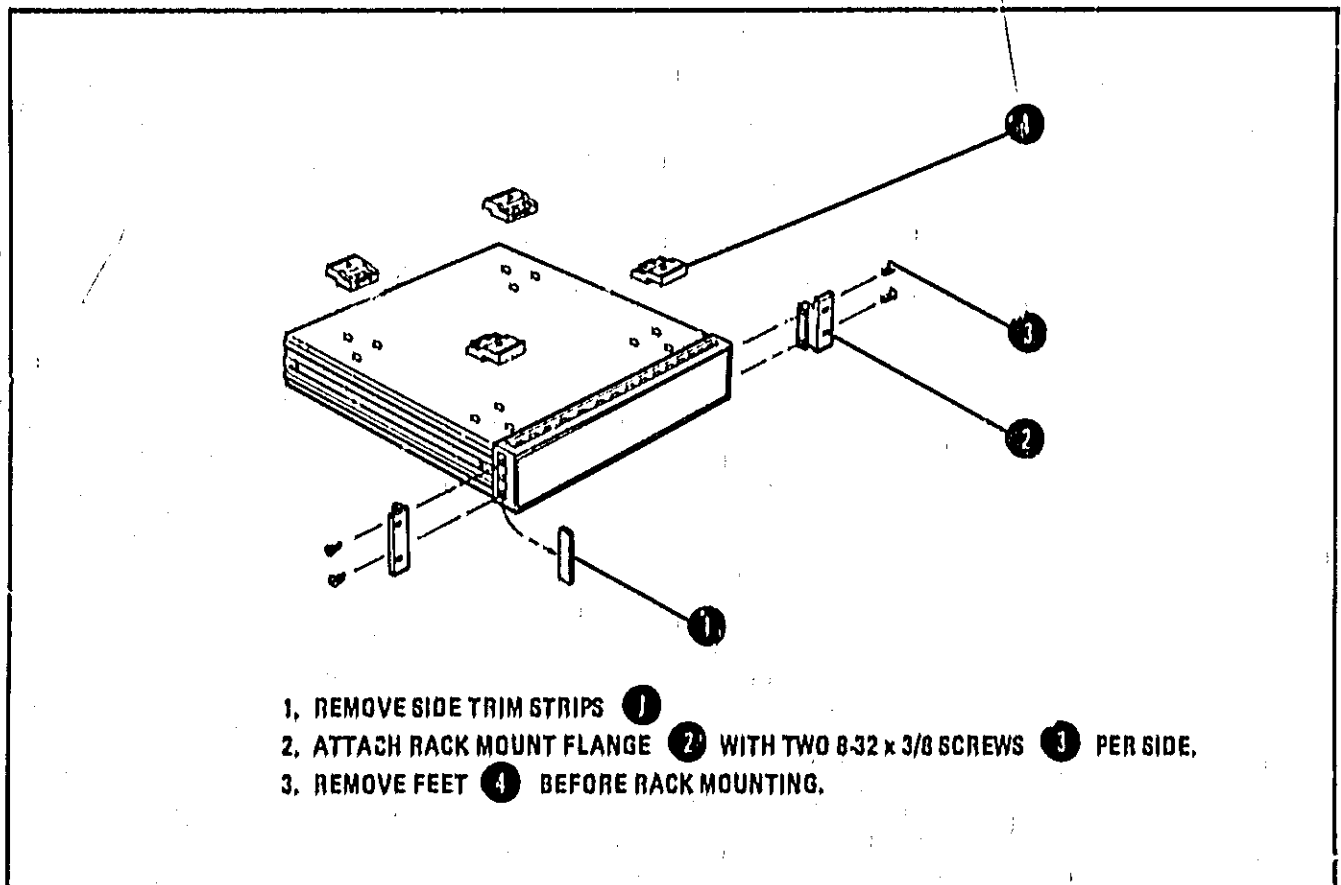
Installation of Rack-Mounting Hardware without Front Handles
